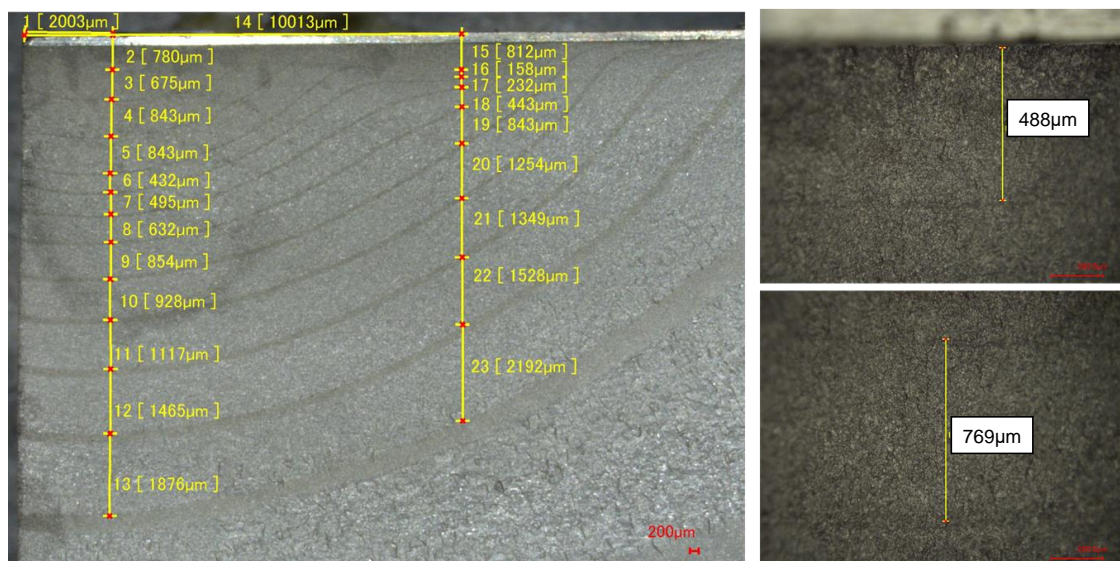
Detail of a fracture surface of an SENB-4P specimen tested in air with clear presence of beach marks that can be used for short crack growth rate quantification.
